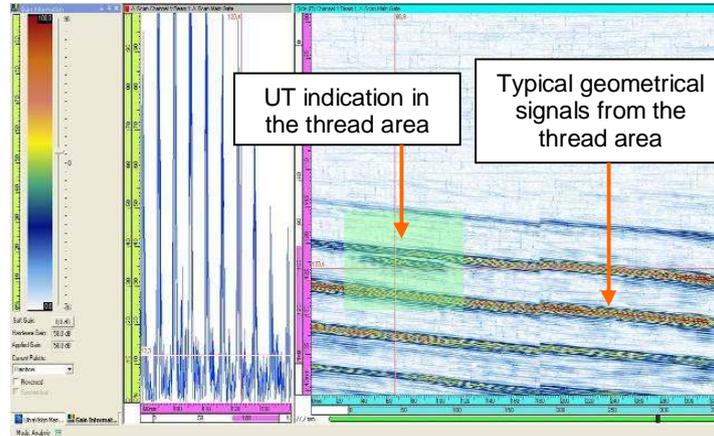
Result of the UT Inspection of a casing joint bolt (B-Scan)
